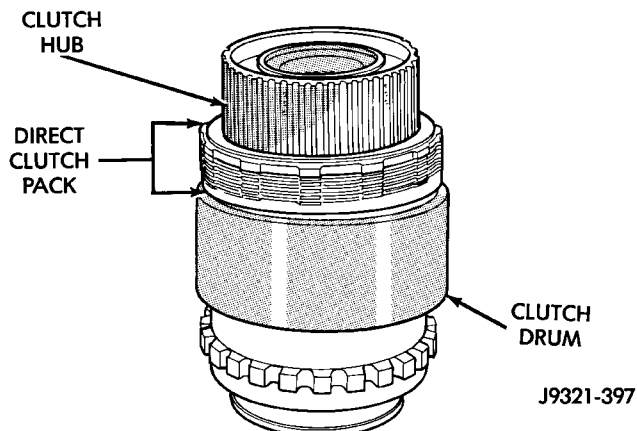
Direct Clutch Pack And Clutch Hub Installation
